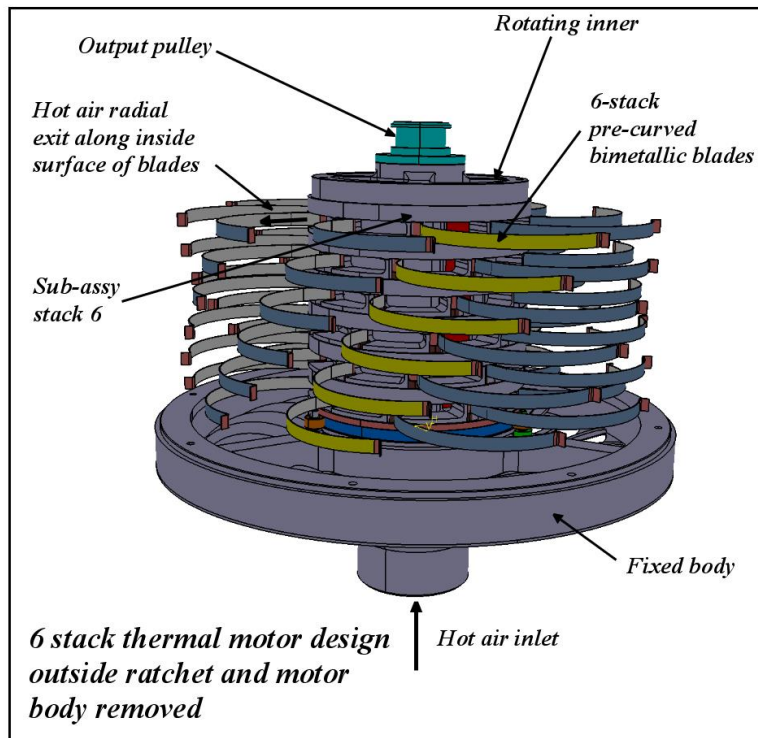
6-stack thermal motor design with outer fixed ratchets removed
